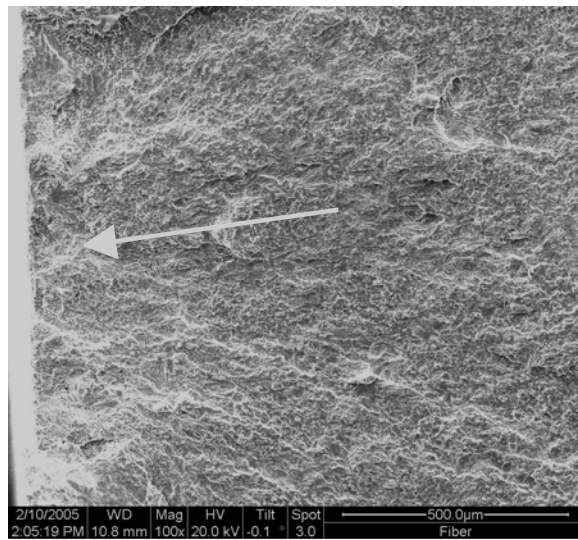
Specimen Ti-05, close-up view of crack initiation site
